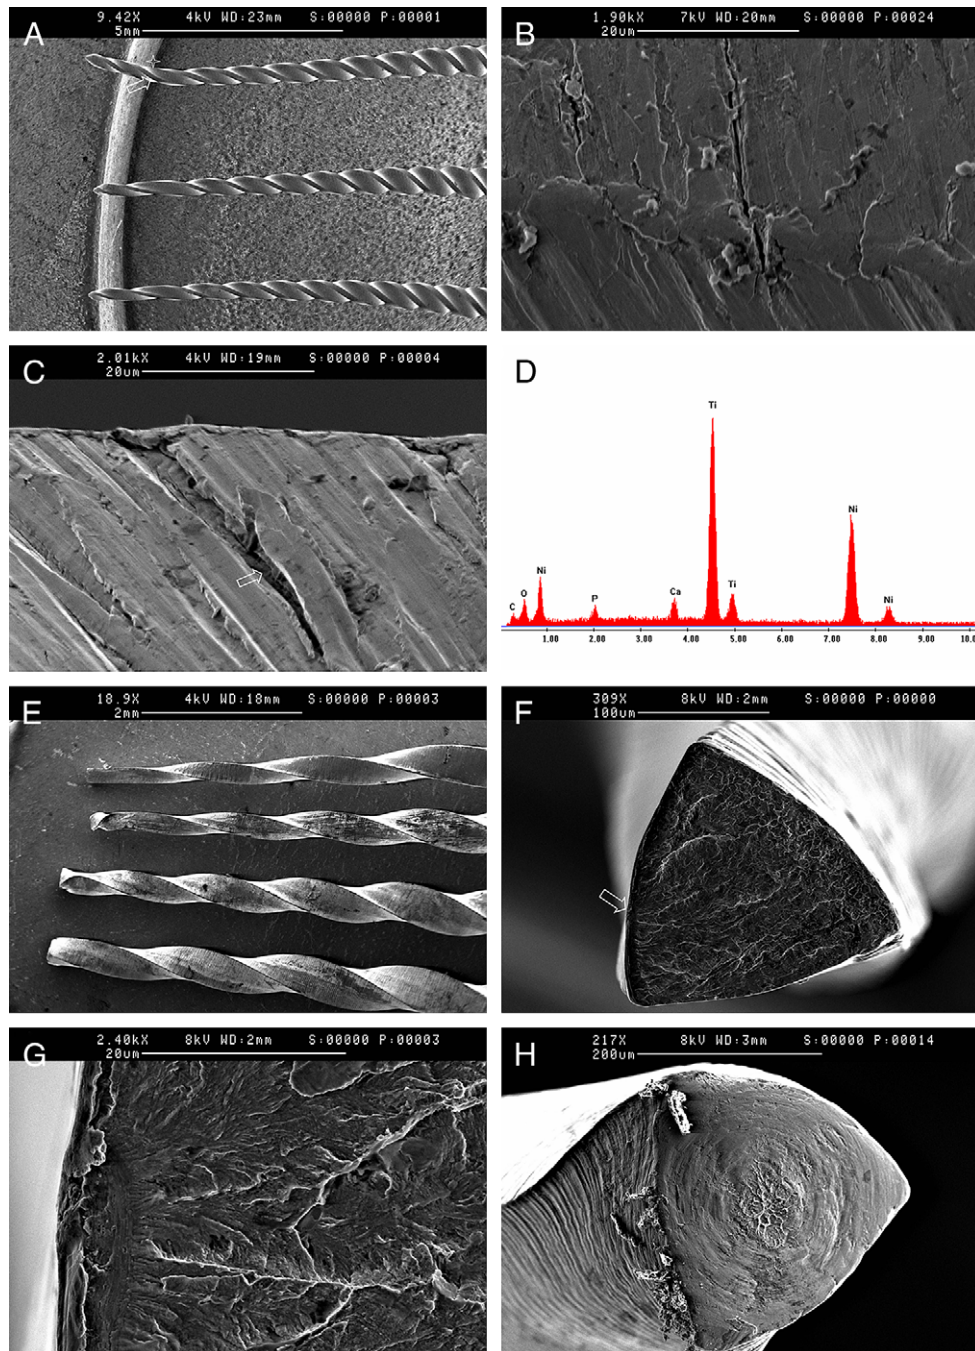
(A) A longitudinal view of deformed ProFile size 25 instruments. (B) A high magnification view of the top specimen in A (arrow) showing a crack at the cutting edge. (C) A high-magnification view of the top specimen in A showing contaminating material remaining in the microcrack (arrow). (D) EDS analysis indicated the presence of calcium, phosphorus, oxygen, carbon, nickel, and titanium. (E) Scanning electron micrographs of fractured ProTaper instruments. (F) Fracture surface of the top specimen (PT Sx file) in E showing fatigue failure. (G) A higher-magnification view of F (arrow) showing a crack origin on the flute. (H) Fracture surface of the third specimen (PT F1) in E showing shear failure.
